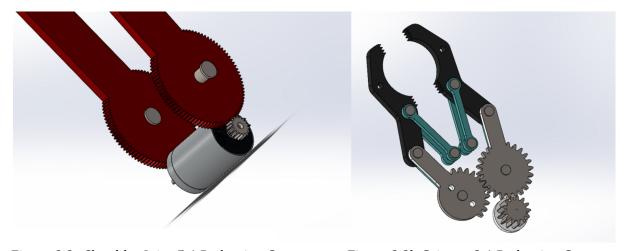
Shoulder Joint 5:1 Reduction Gear
